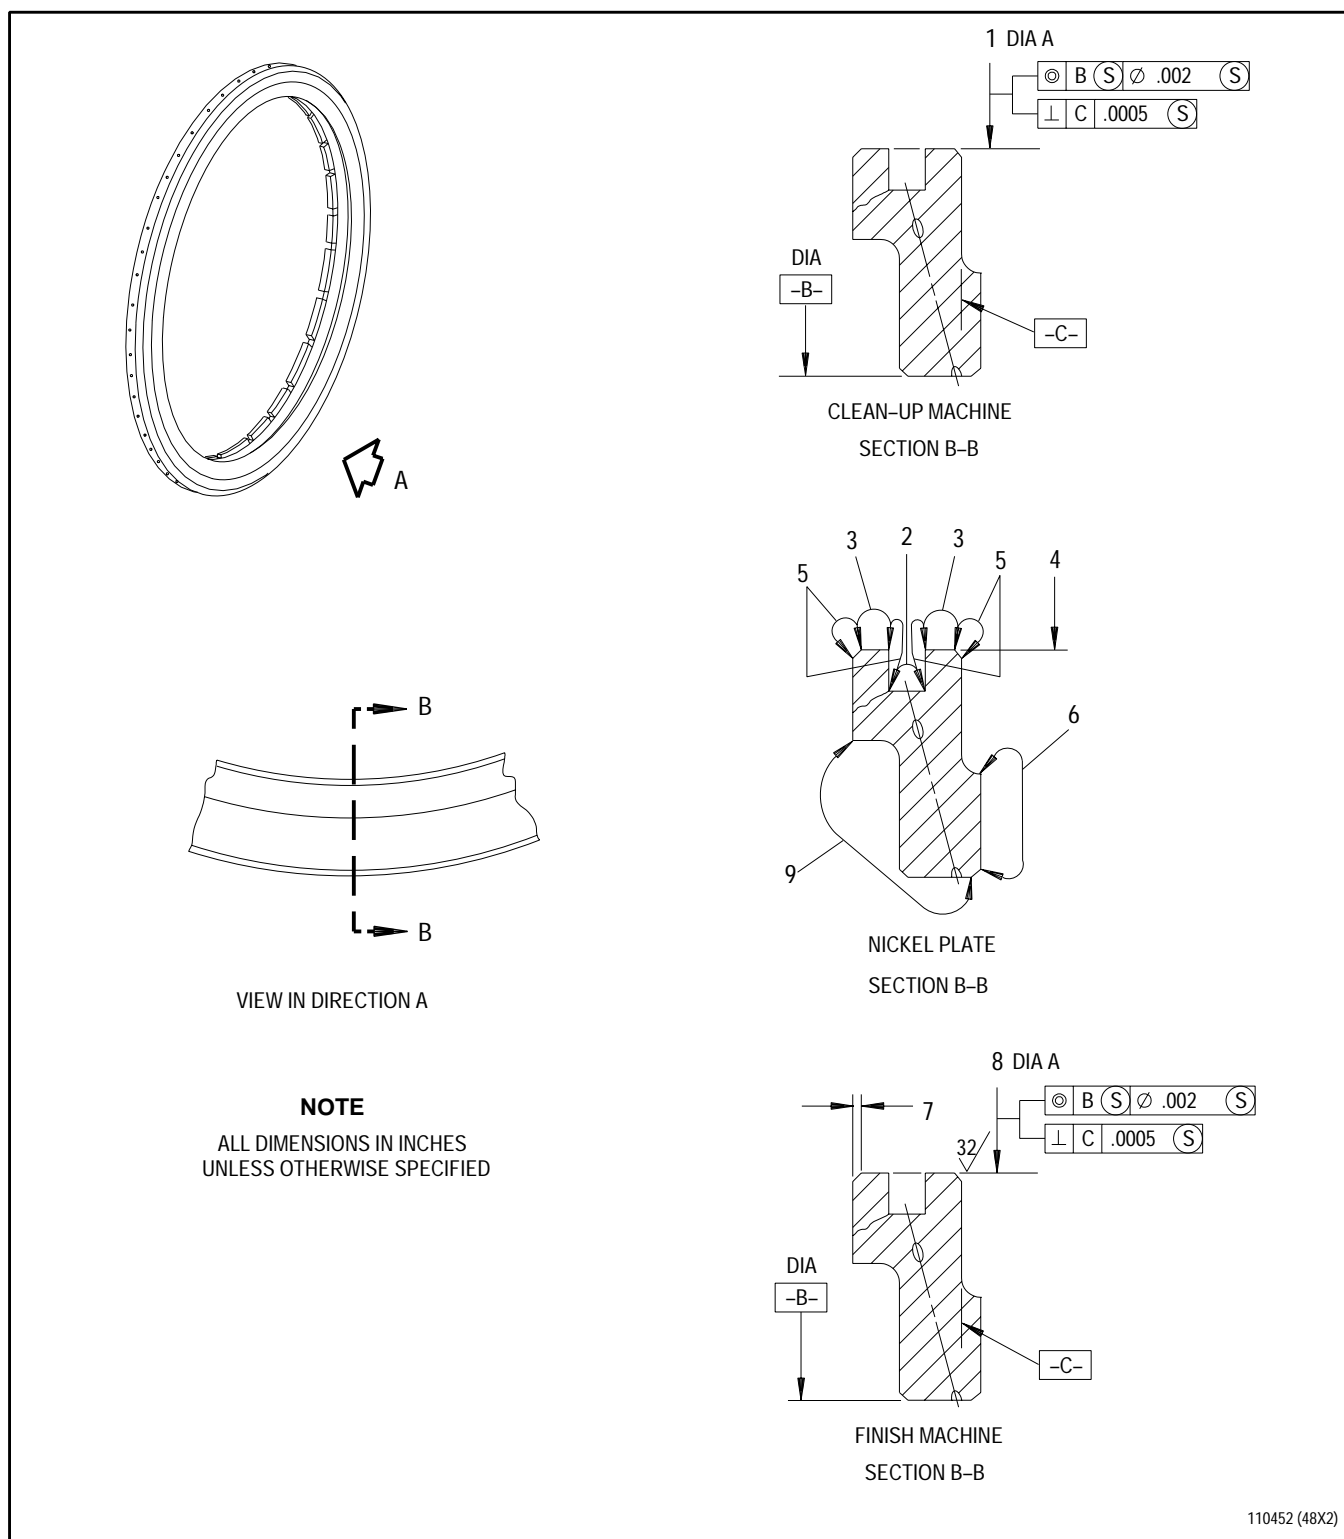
No. 4 Bearing Rear Seal Seat (PN 4083144) - Nickel Plate Inside Diameter Repair
